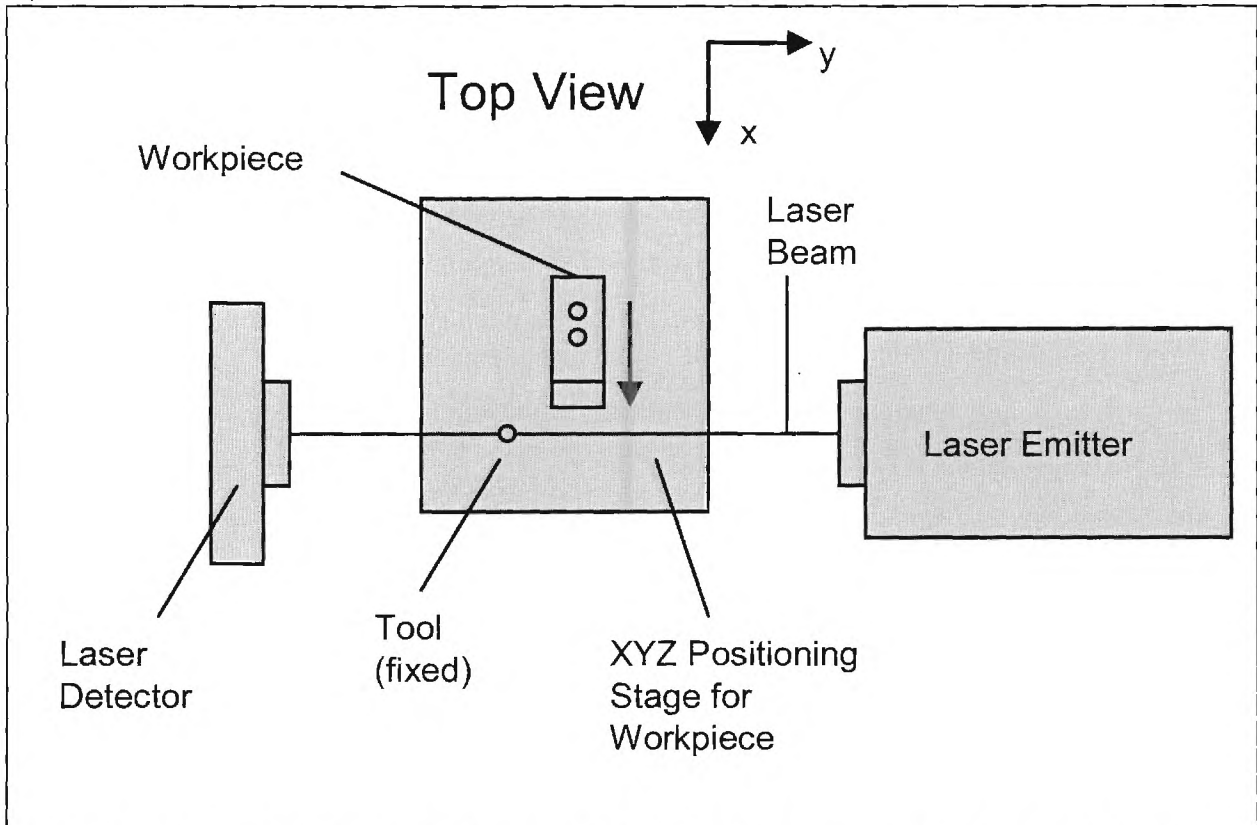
Diagram of method used for determining the location of the intersection of the workpiece edge and the tool edge.
